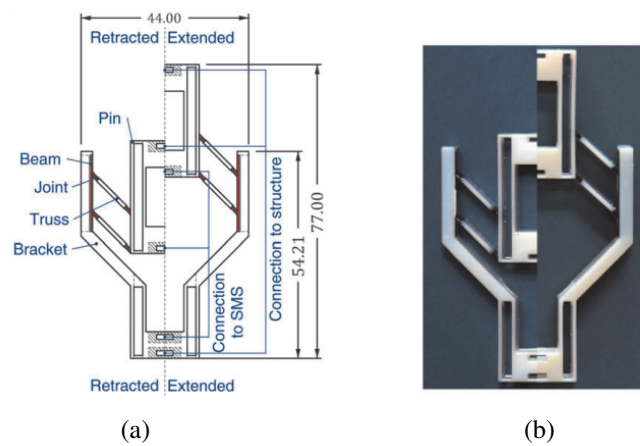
Bistable Mechanism concept (a) and specimen (b) [37].
